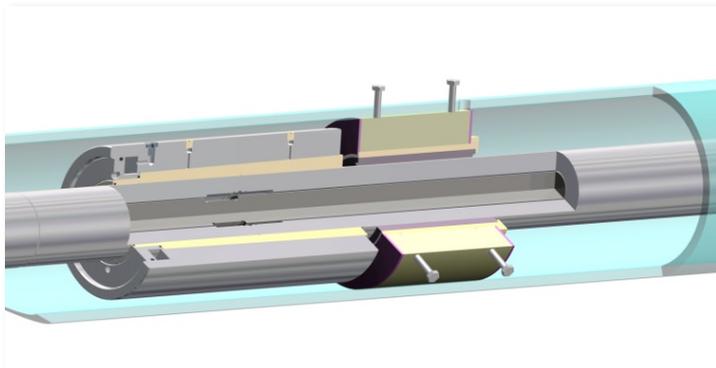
Outer stern tube shaft bearing and shaft coupling.
